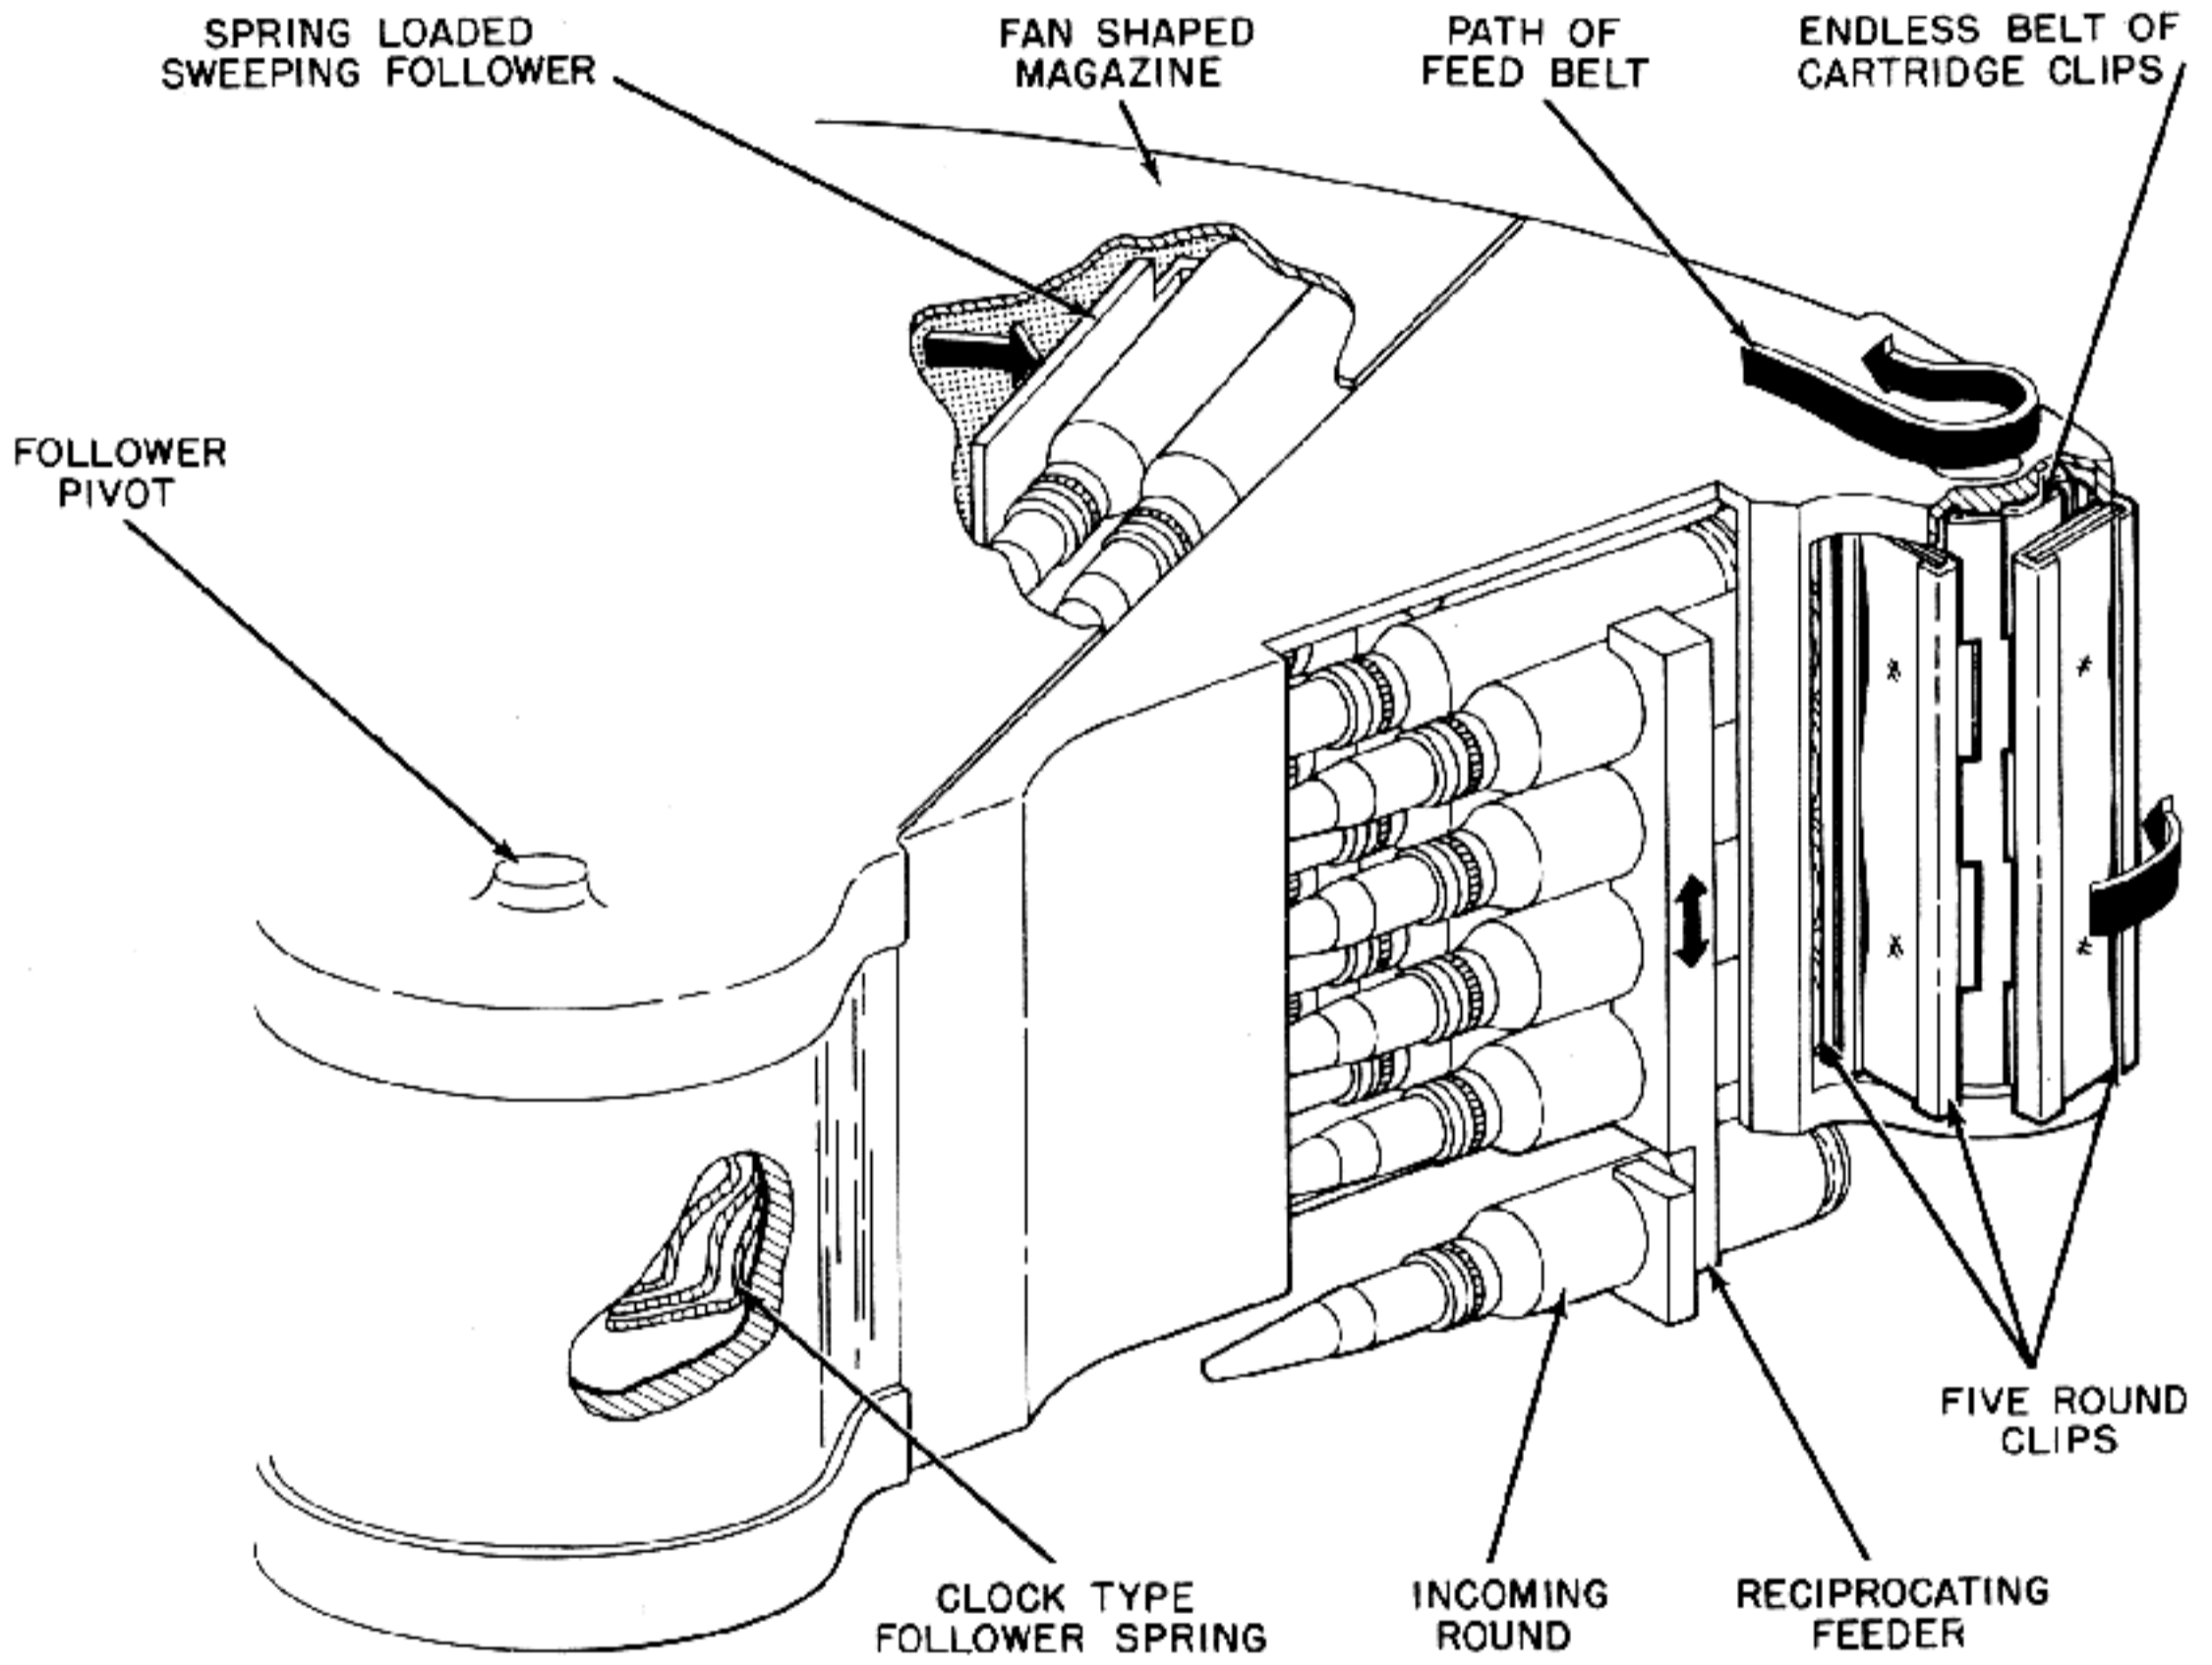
Fan-Shaped Magazine Stores Ammunition on Endless Belt of Clips.
